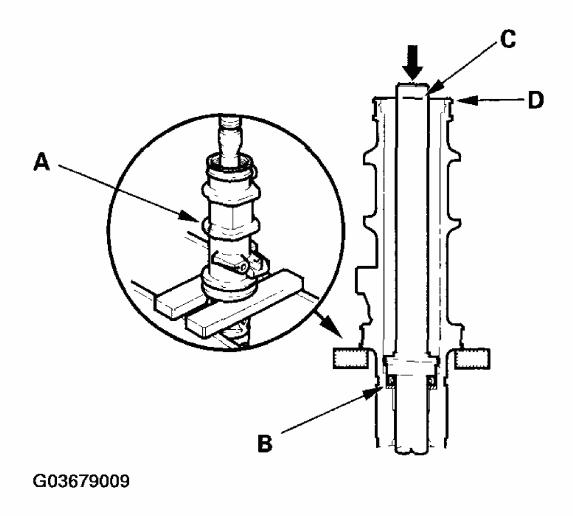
Pressing Cylinder End Seal Into Bottom Of Cylinder Courtesy of AMERICAN HONDA MOTOR CO., INC.
